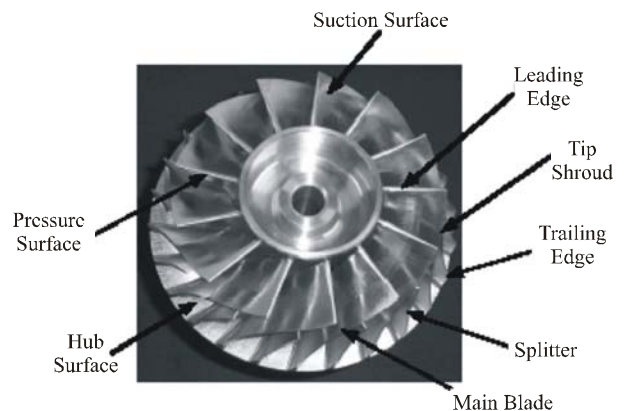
DIFFERENT SURFACES OF AN IMPELLER, [1]
